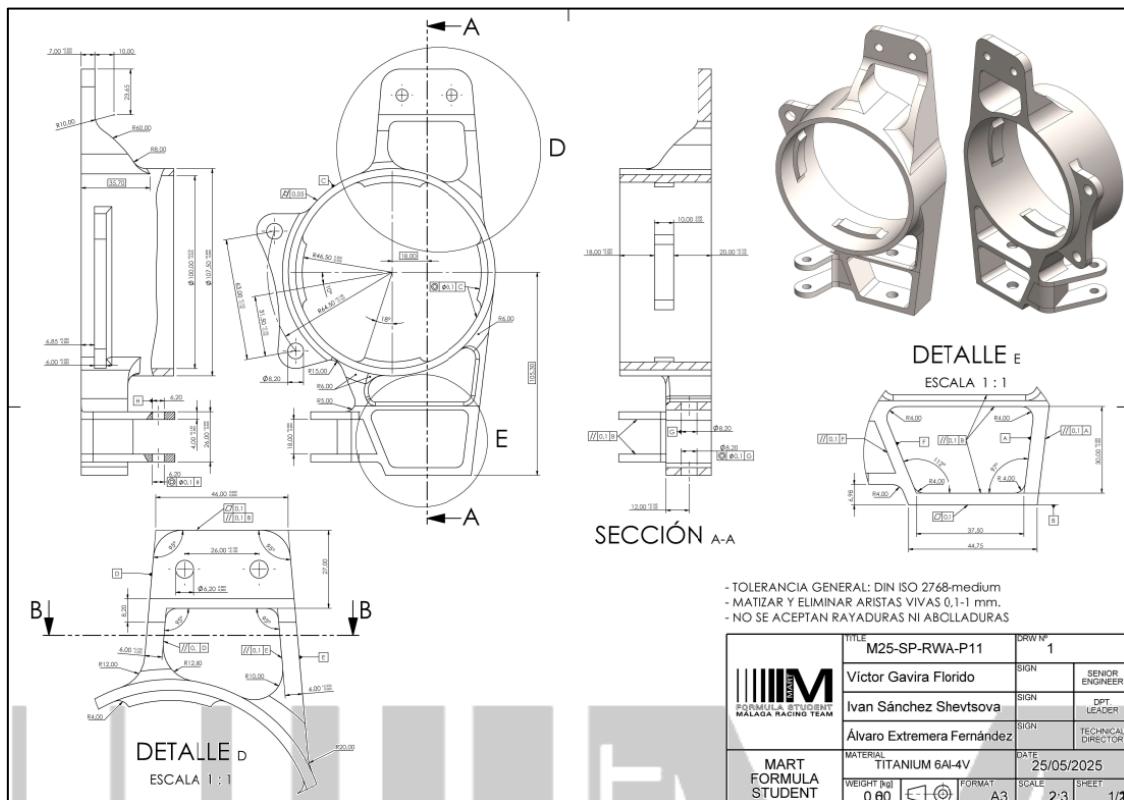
First Sheet of the Rear Upright's Manufacturing Drawing.
